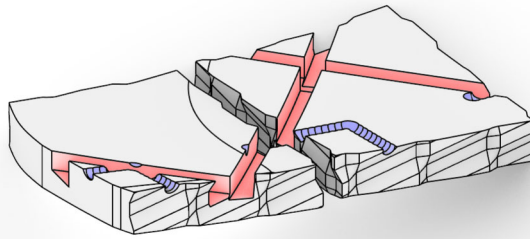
Bottom view of two 3D-printed parts assembled. The grooves that align with the wooden frame are marked in red, and the round engravings for orienting the parts are marked in blue
